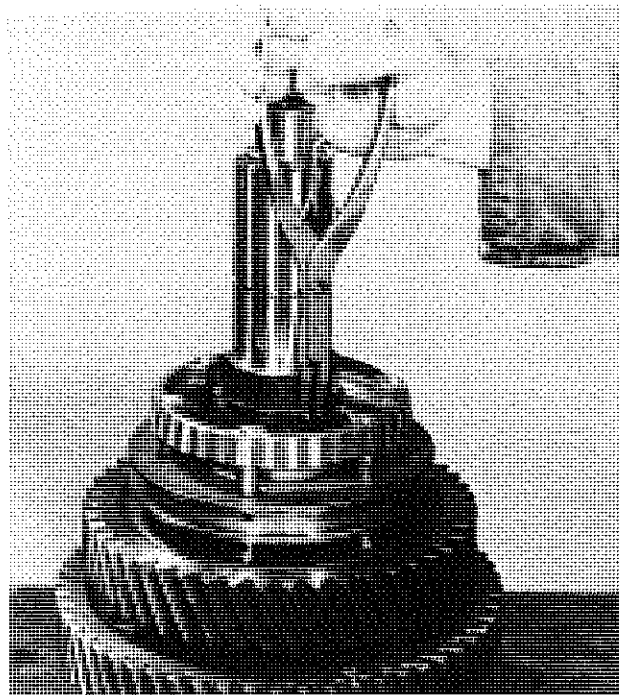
Installing 2nd-3rd Speed Clutch Gear Snap Ring
